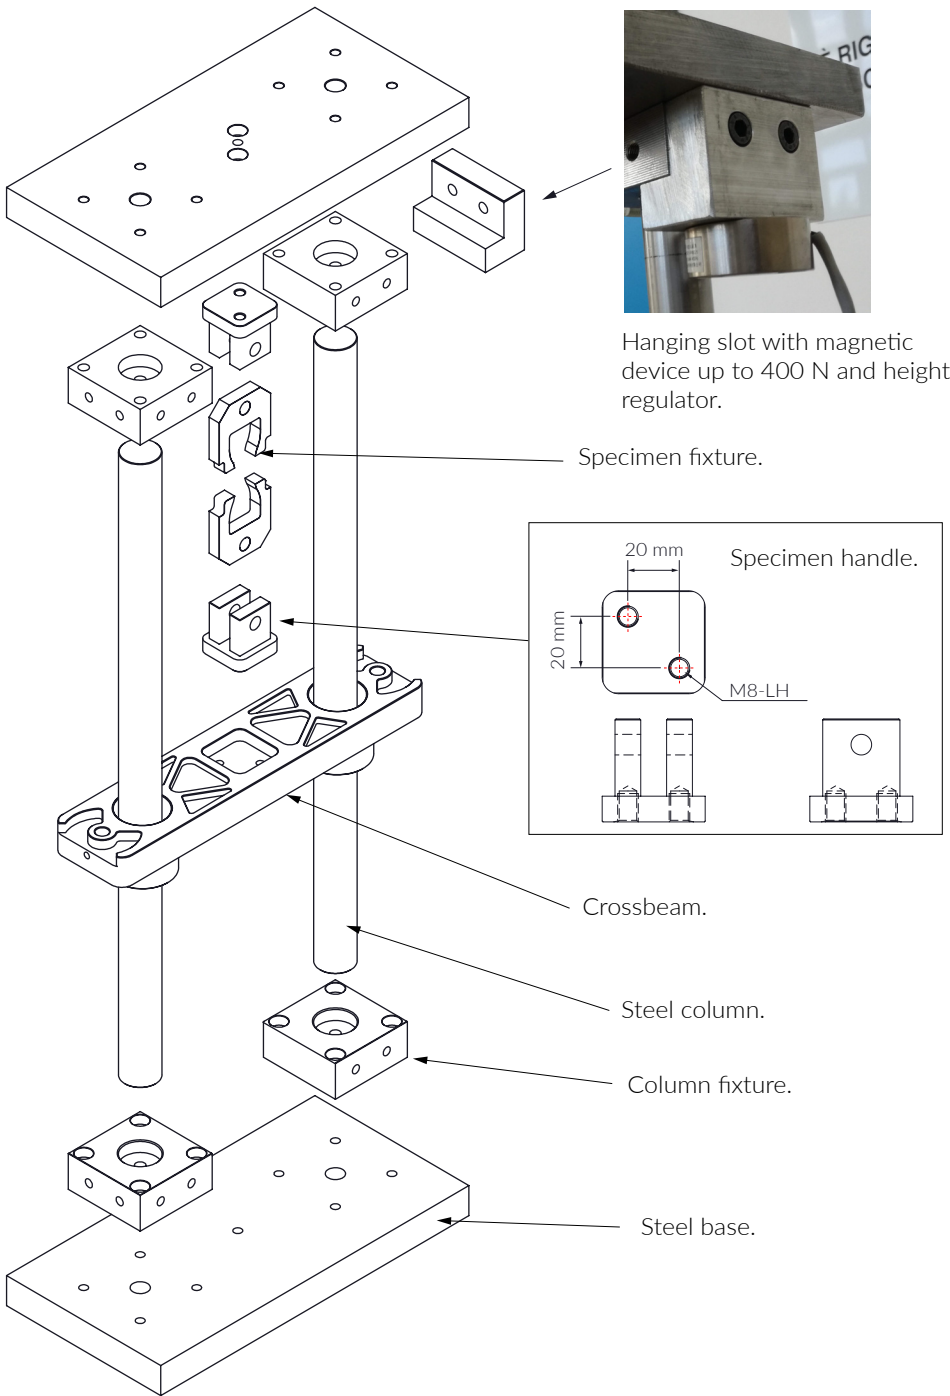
Exploded-view drawing of the tensile machine with construction details.
